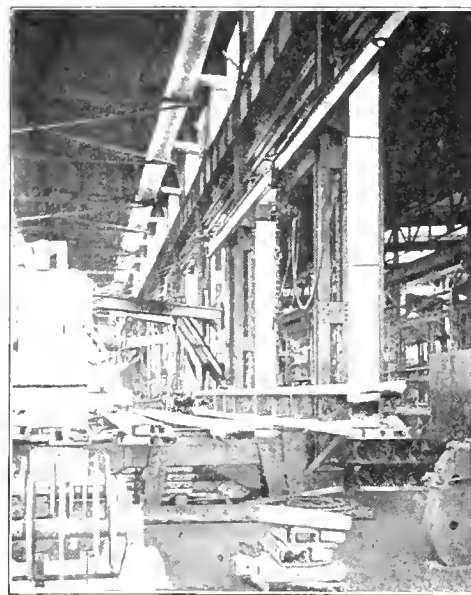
Assembling Centre Sills for Steel Box Cars.
